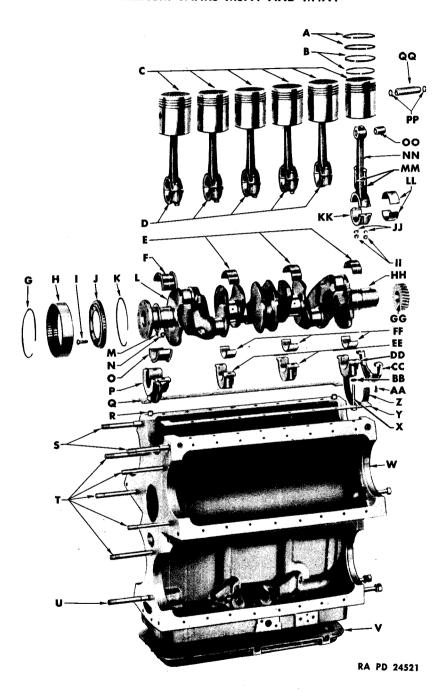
Lower Part Of No. 1 Engine, Showing Crankcase In Position
